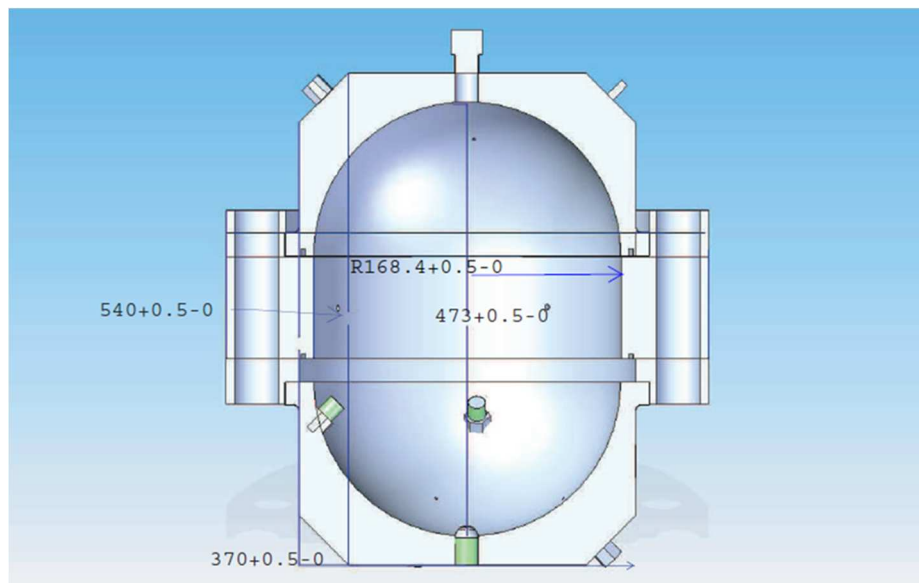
Section of final design of R-30 ignition chamber with key dimensions in mm.
